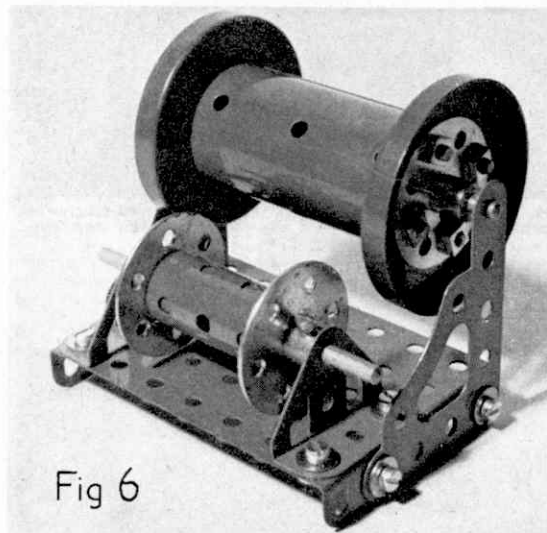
Improved versions of winding drums, the smaller made from a Sleeve Piece and the larger from a 2½ in. Cylinder fitted with bigger end cheeks.
